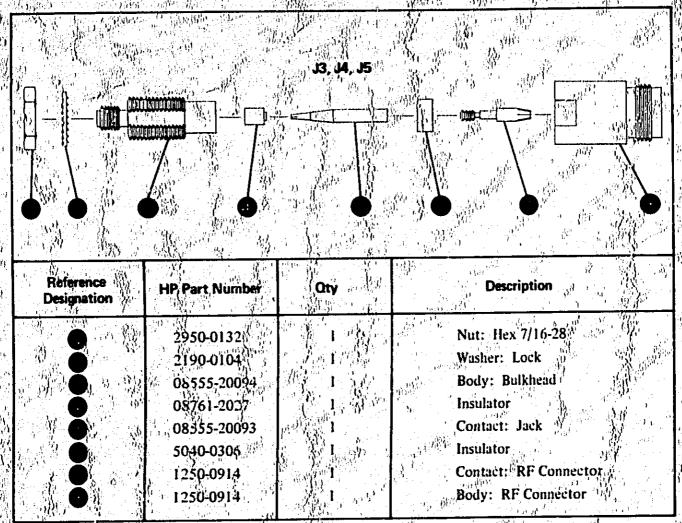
Type N Comector, Assembly (0\$502-60001), Exploded View
